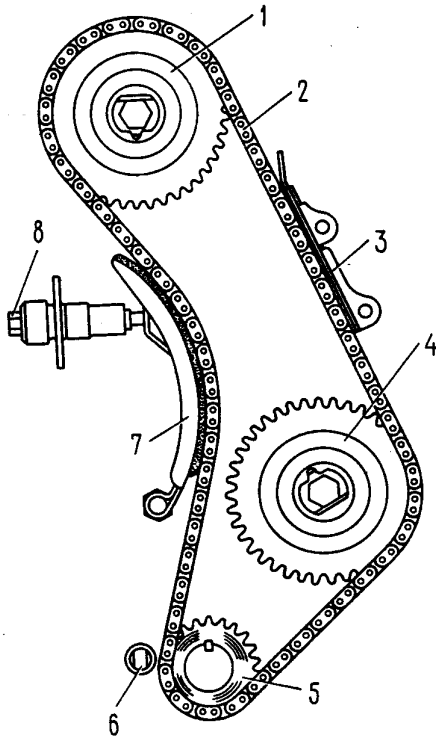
Camshaft and Accessory Drive Diagram:
